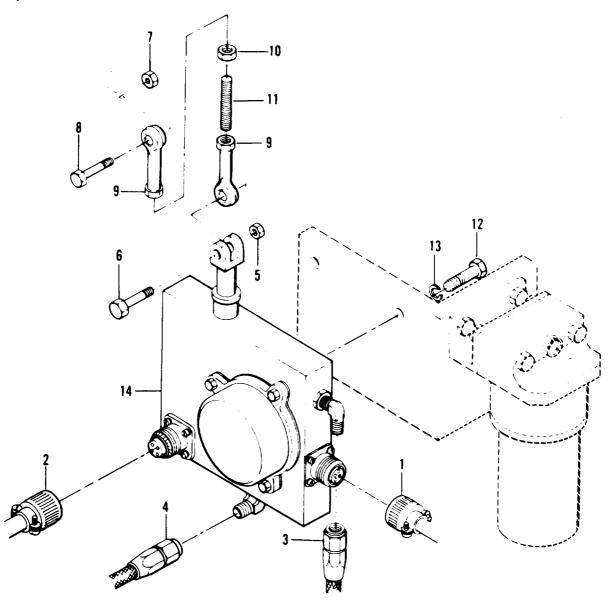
Hydraulic Actuator Unit, Removal and Installation (Electro-Hydraulic Governor Equipped Precise Sets Only)
